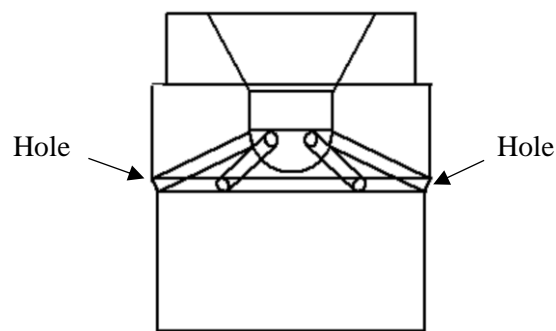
Modified diesel injector nozzle tip showing the view of the holes of interest<sup>16</sup>.
